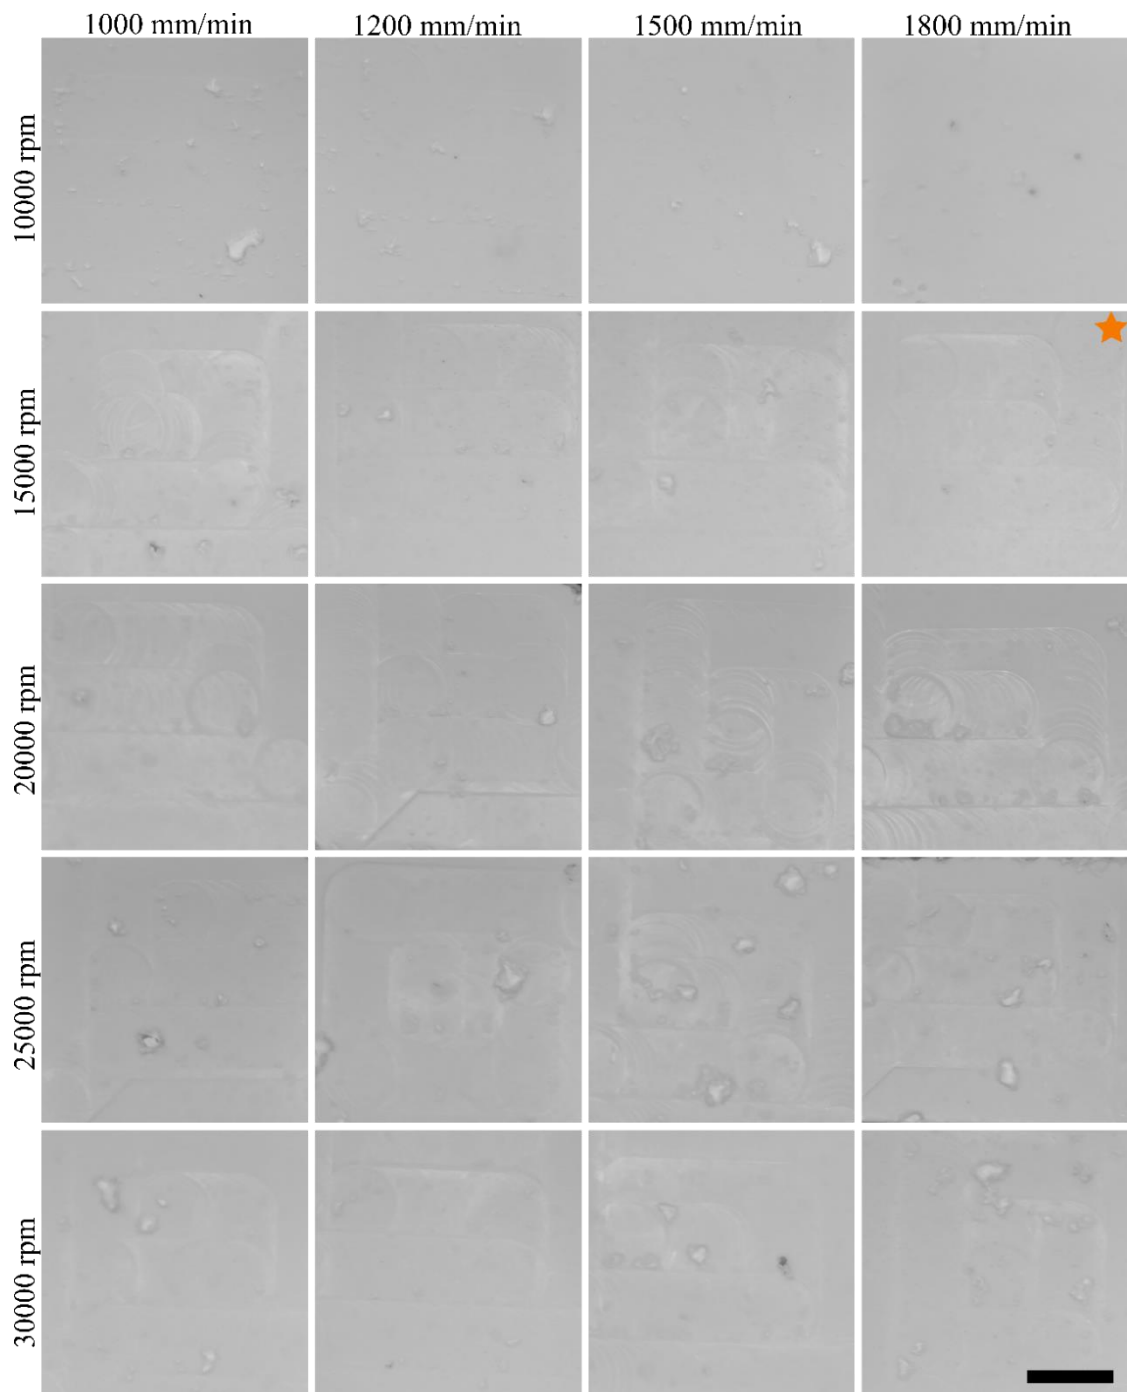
Optical images of machined green bodies (2 mm tool) before sintering, with the optimal machining parameters for the 2 mm tool (15,000 rpm, 1,800 mm/min)
